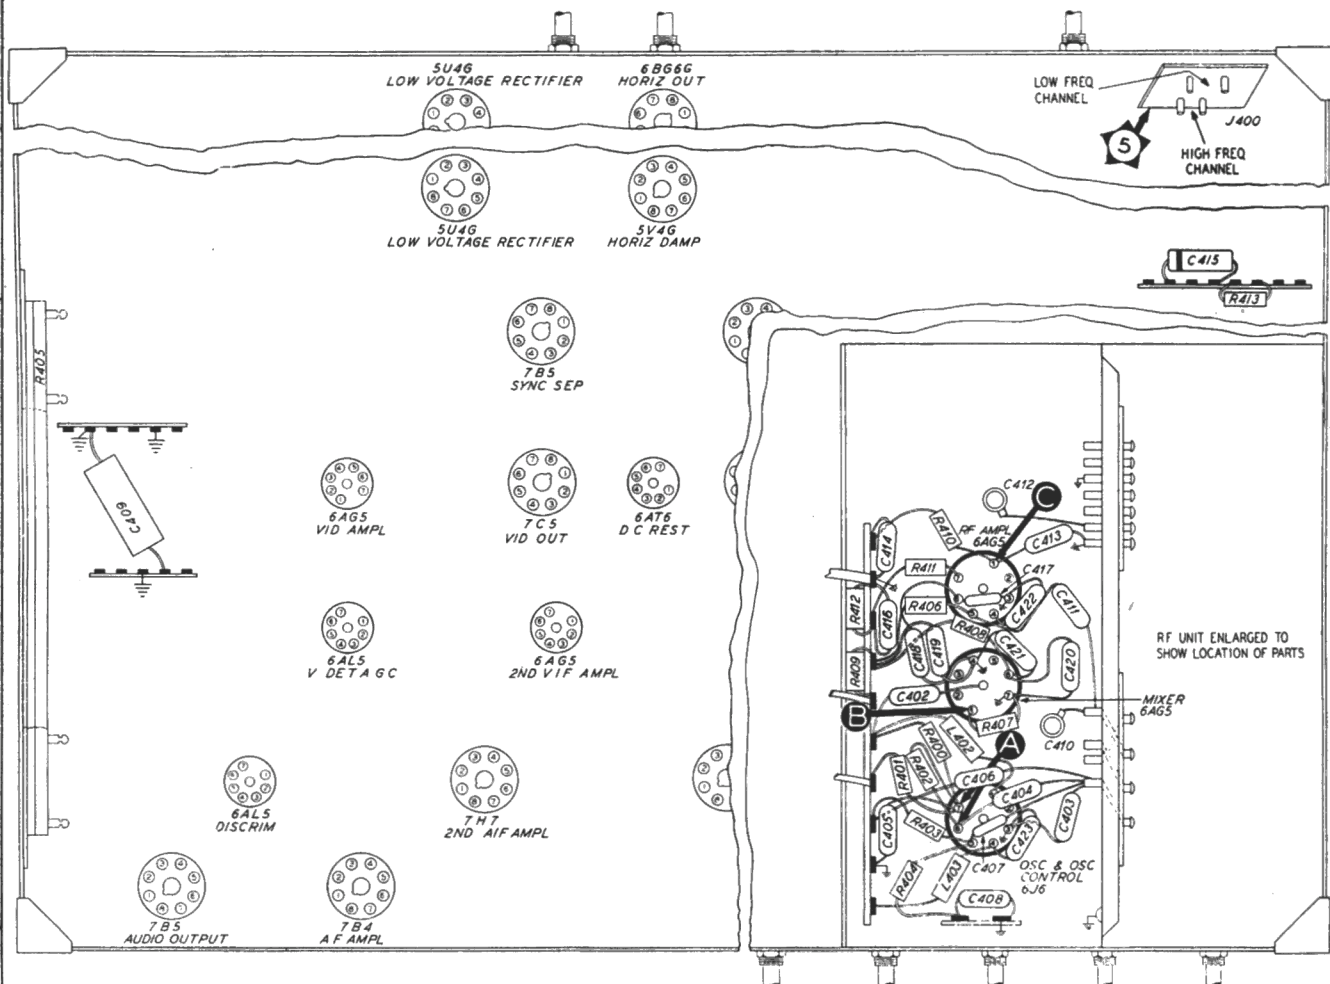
BOTTOM VIEW, SHOWING SECTION 4 TEST POINTS
